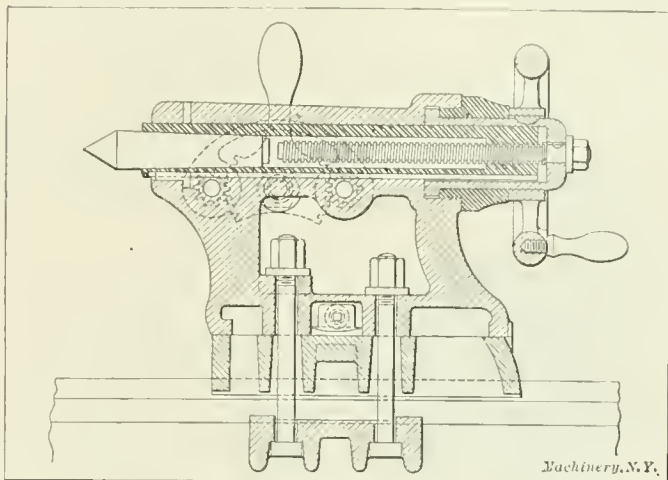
Sectional View of Tailstock showing Method of Clamping and Spindle Construction
